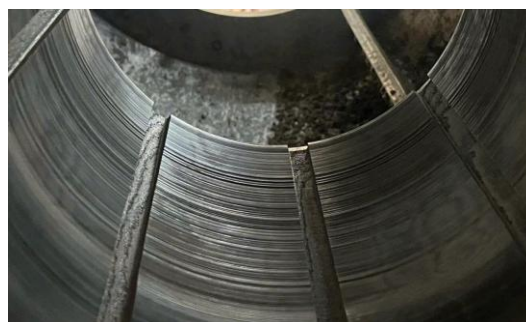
Vessel 10 (Thai Binh power-station pump) after 6 months: Sand and silt deposits blocking cooling-water passages and bearing housing. Shaft runout 0.18mm (3.6 $\times$ allowable) combined with high TSS produced asymmetric premature failure
